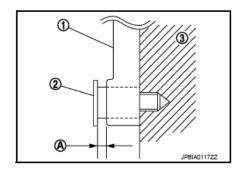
Identifying Slack Guide And Mounting Bolt Courtesy of NISSAN NORTH AMERICA, INC.
